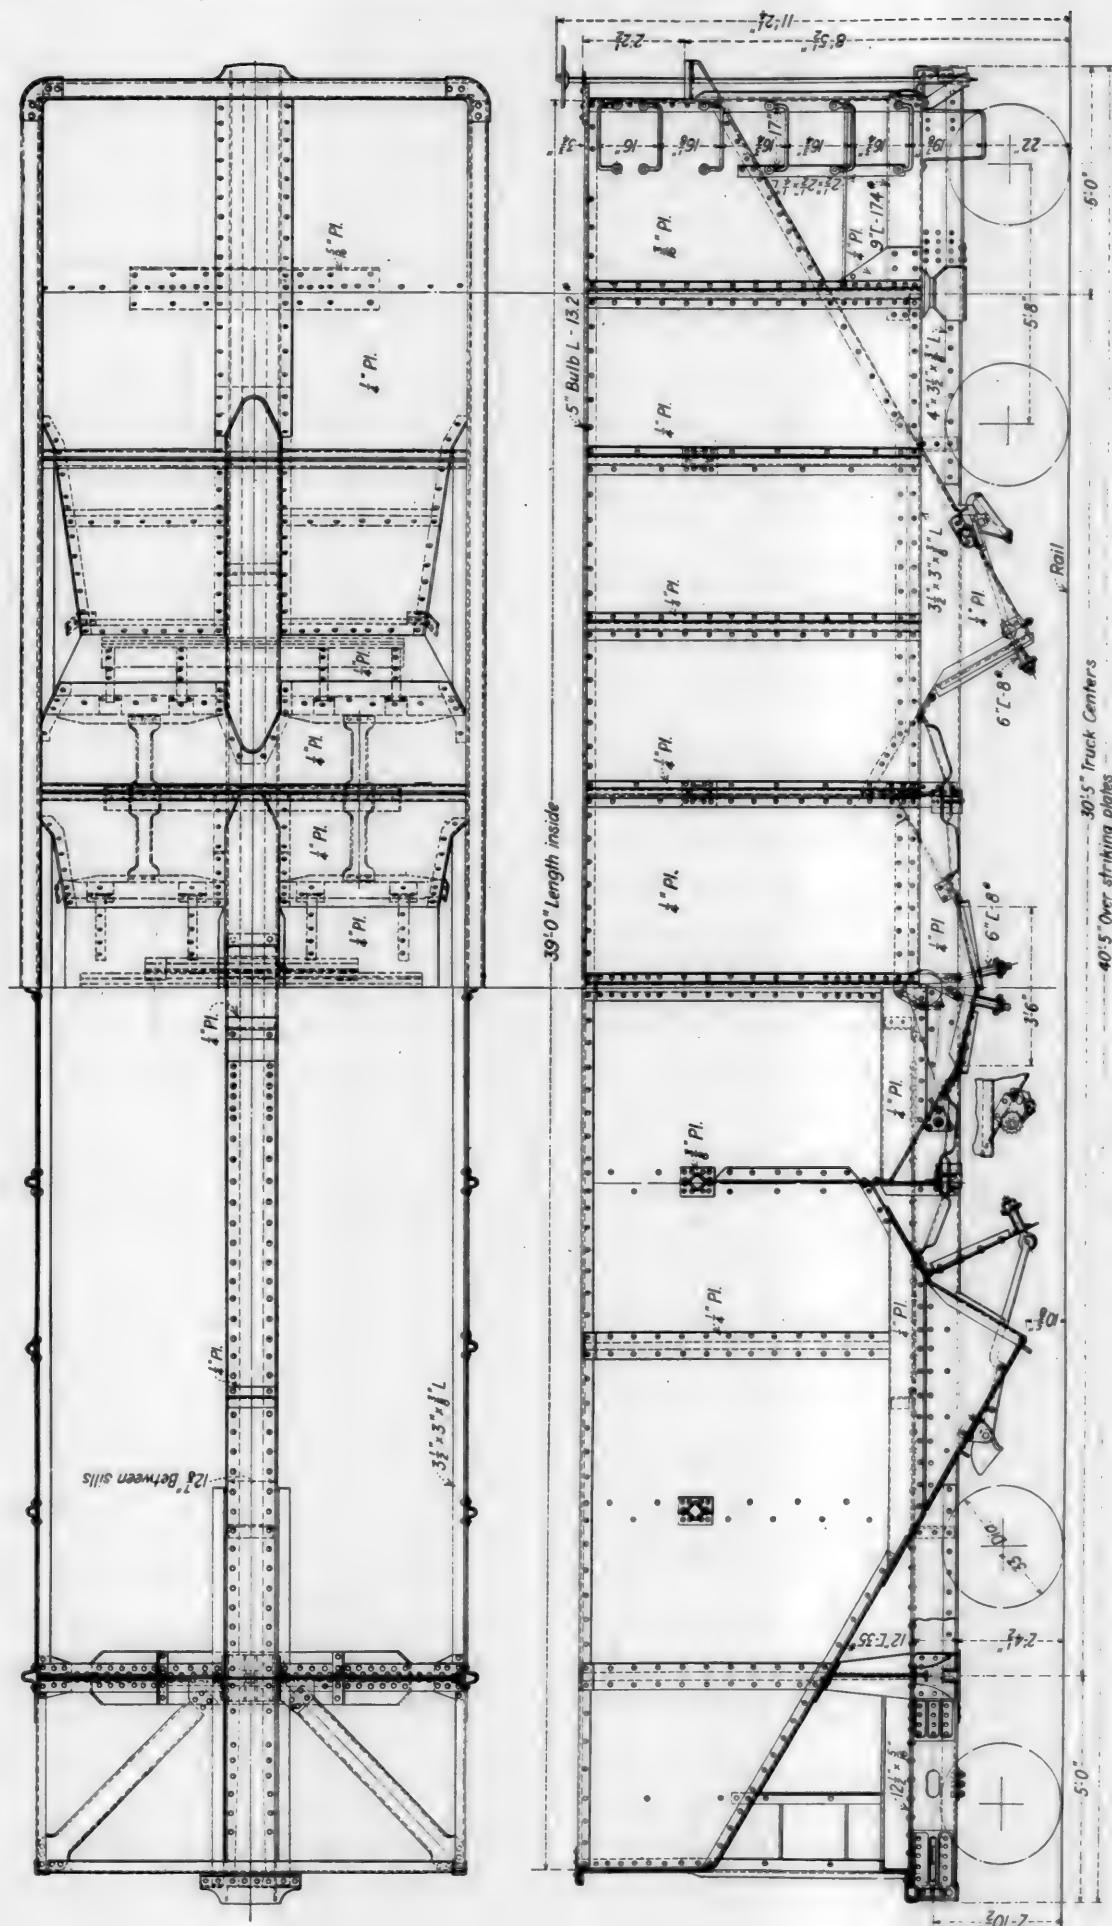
General Plan for the Standard 70-Ton Hopper Car
